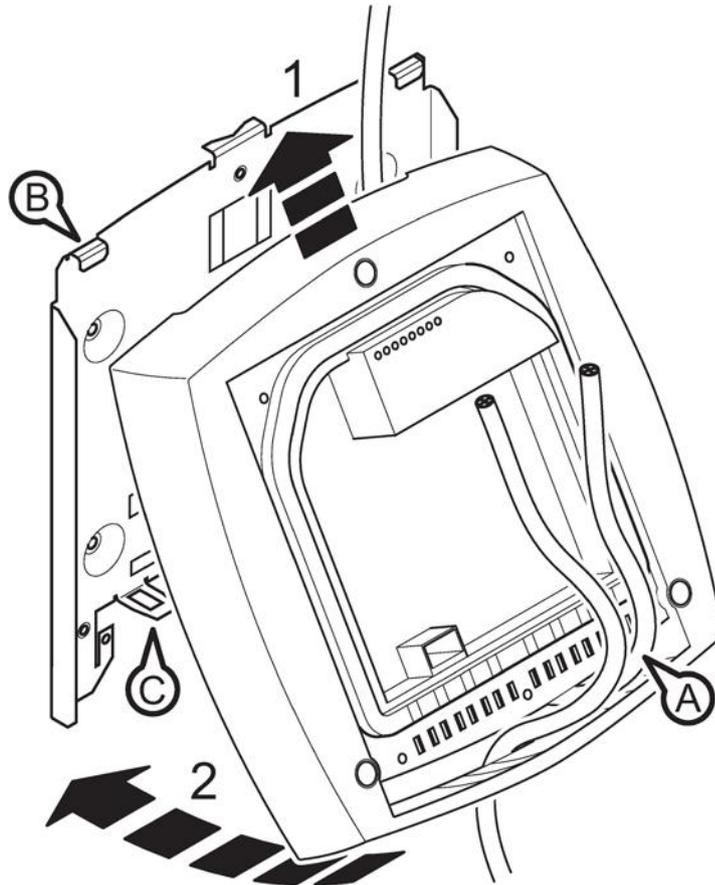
Fitting the SCALANCE W786 to a mounting plate
